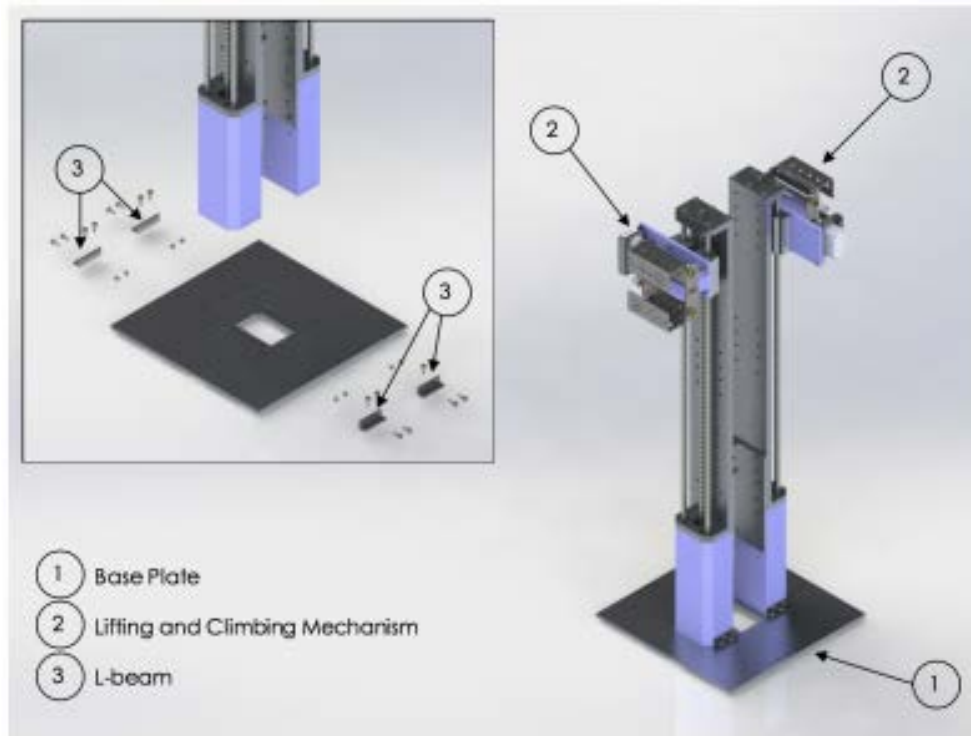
Isometric view of lifting and climbing mechanism on base plate with enlarged exploded view.
